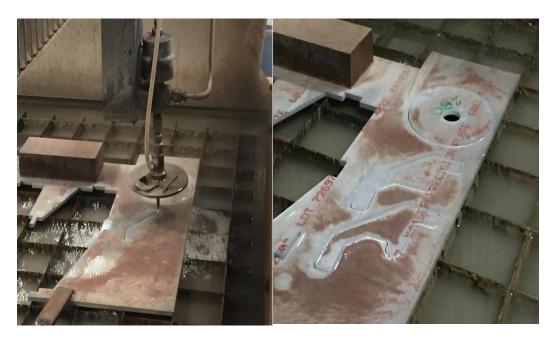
Waterjet outer profile and hole locations on mid-drive mounting plates and adapter
